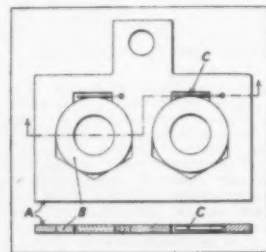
Turn-over fixture employed to hold small cylindrical parts, such as washers, while grinding both sides on an abrasive-belt machine.
